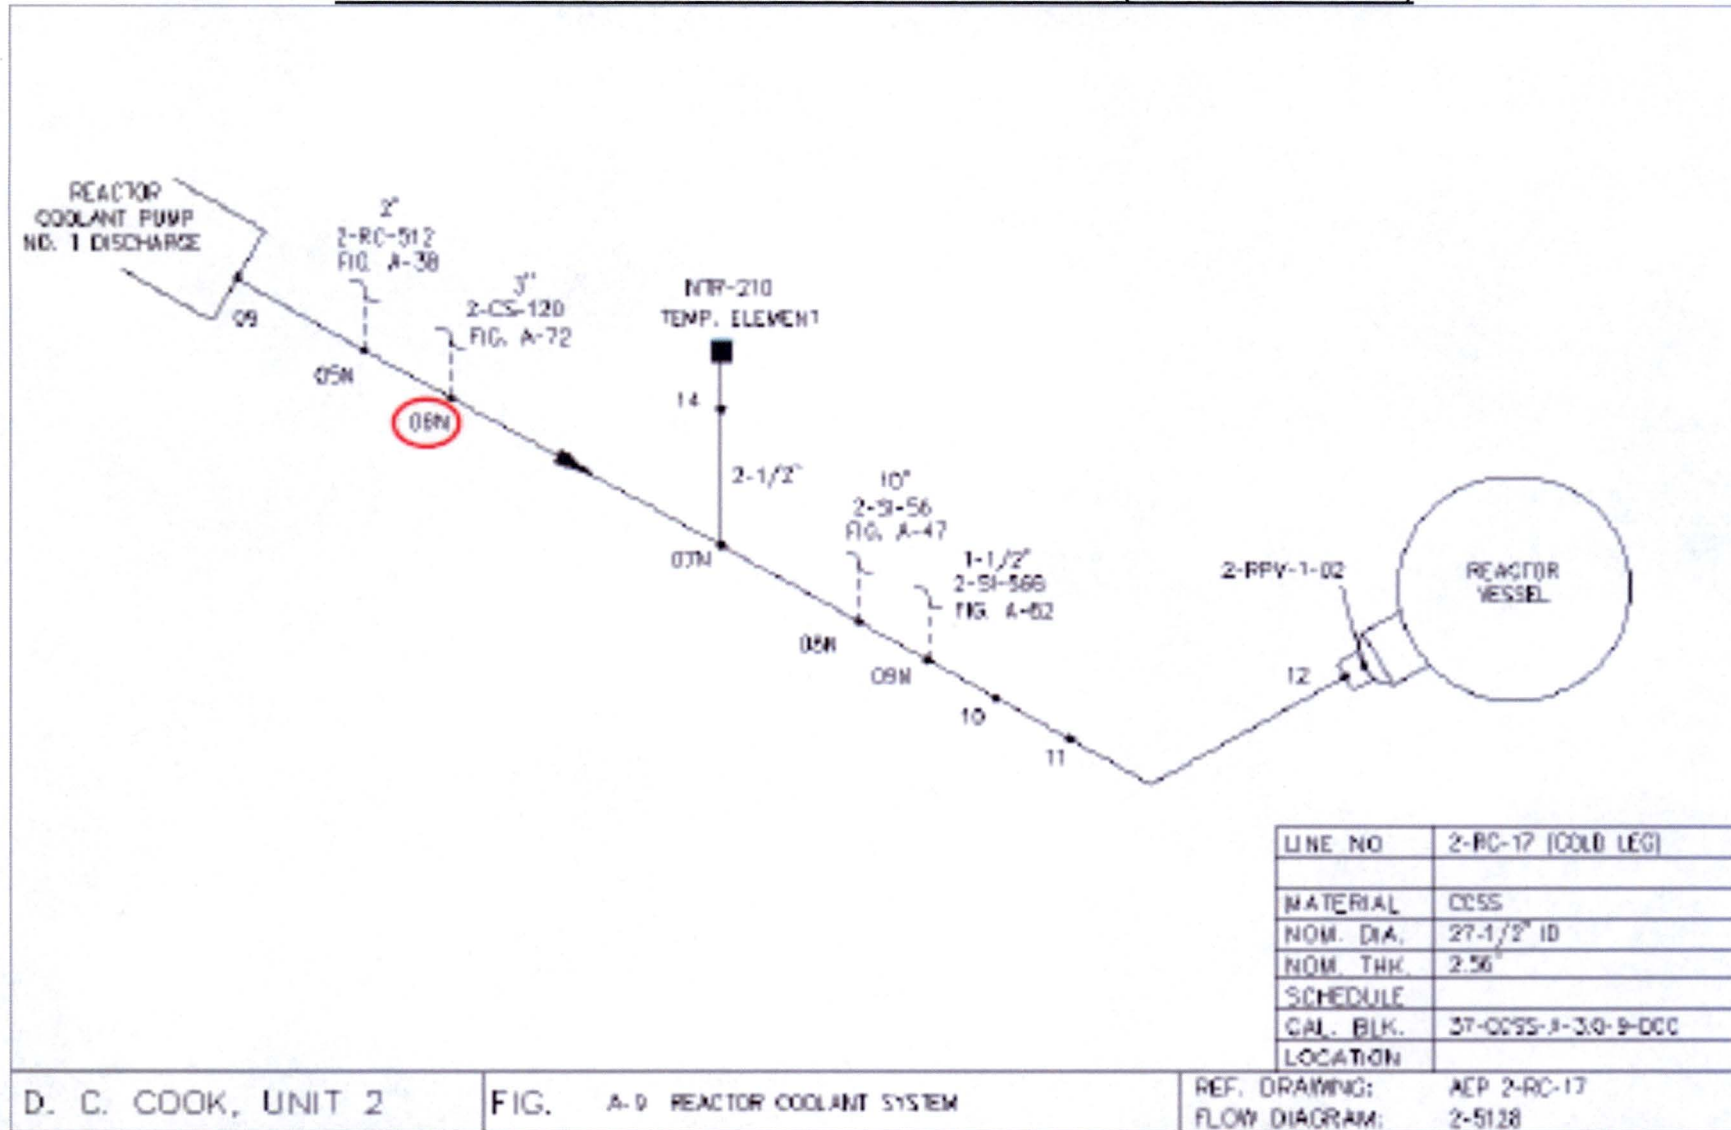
Weld 2-RC-17-06N (Extracted from Reference DRAWING 2A-9)
